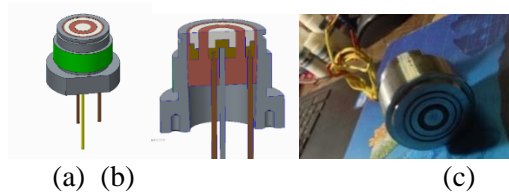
Actual Sensor views; (a) 3D view, (b) Cut Section, (c) Actual Sensor
